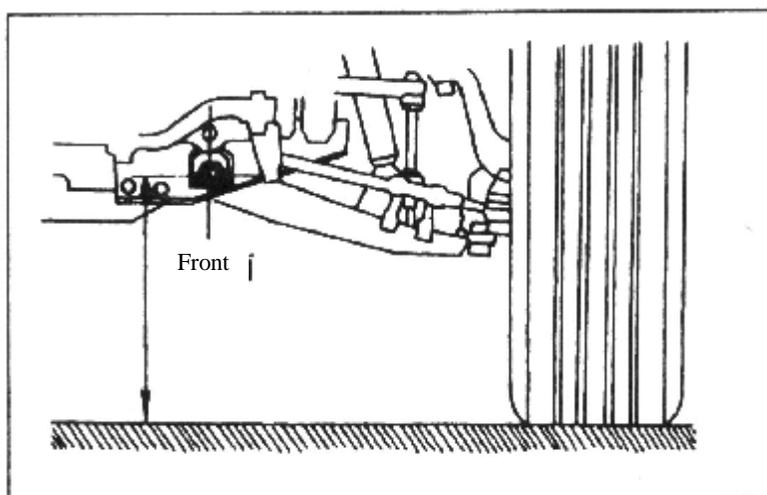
Measurement of Front Side Height of Vehicle
